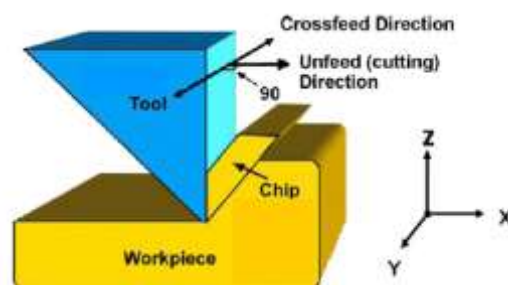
1 Dimension Vibration Assisted Machining, Source: Review of vibration-assisted machining, 2007
